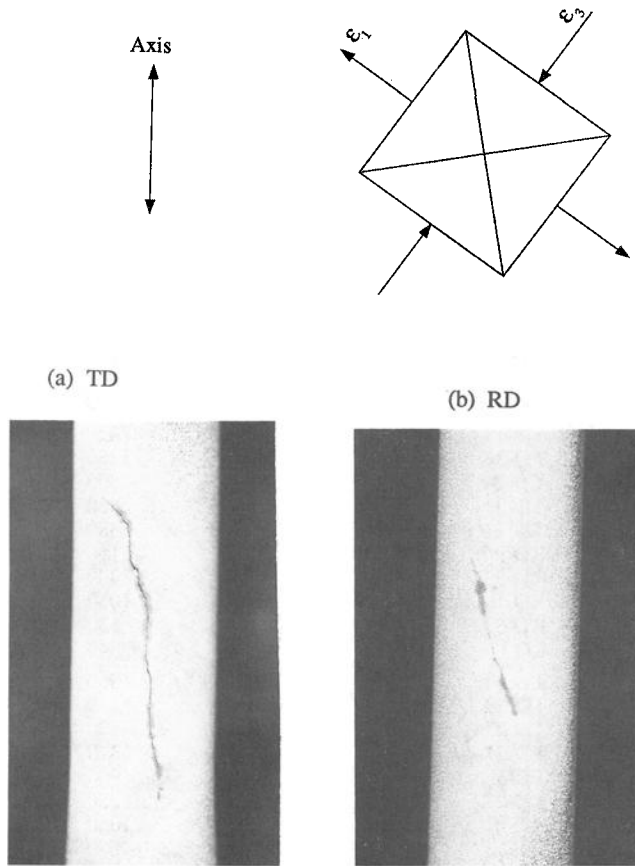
Photographs showing the cracks, their orientations, and the planes of maximum shear on the specimen surface under combined tension/torsion in-phase: (a) a TD specimen, and (b) an RD specimen.
